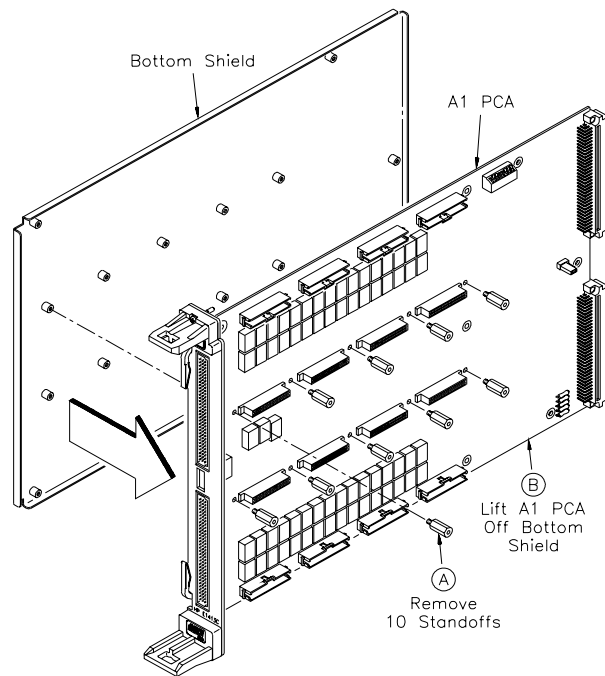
HP E1415A and HP E1419A Disassembly (cont'd)
